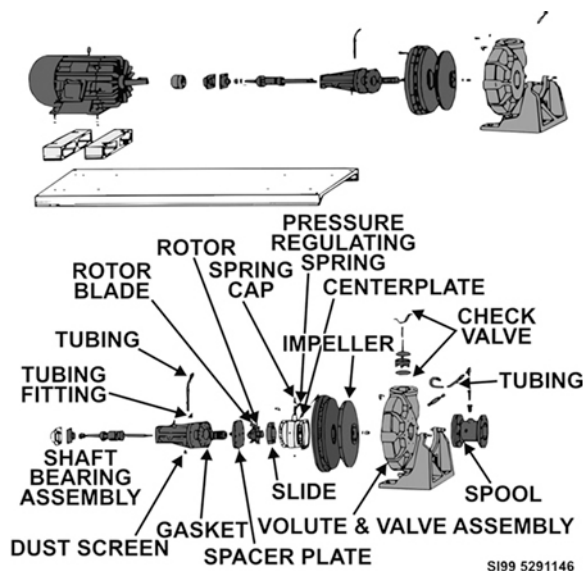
Gilbarco centrifugal pump (exploded view).
